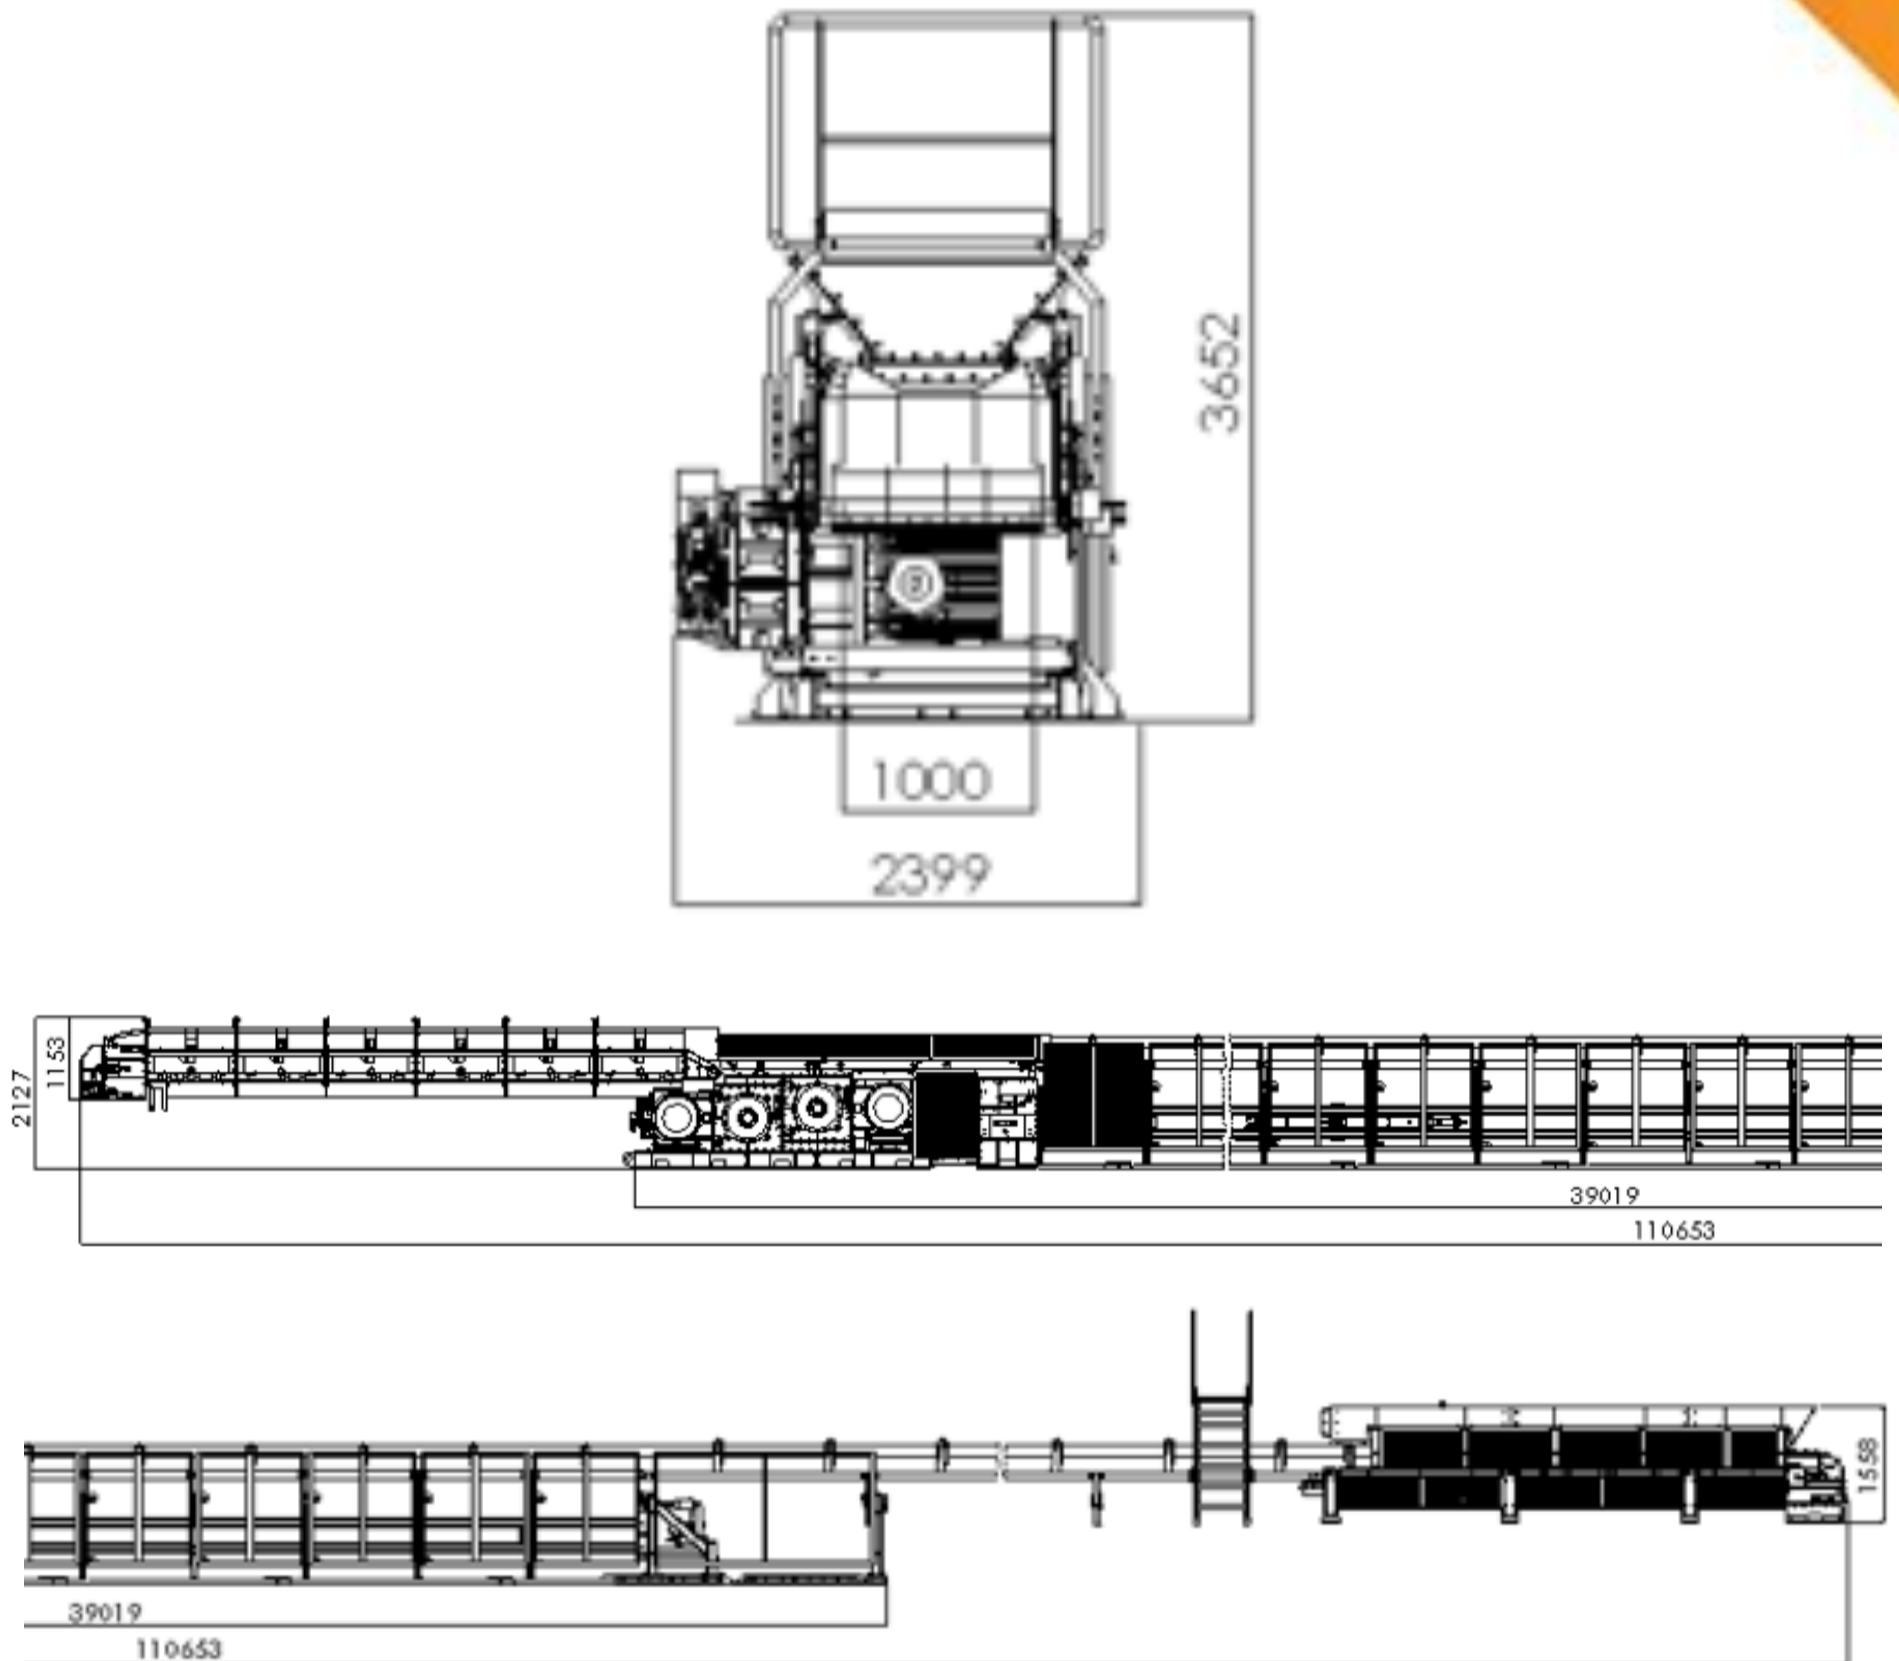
AR-Project 1000 belt conveyor — 150 m long, designed for mined material haulage — technical assembly drawings.
